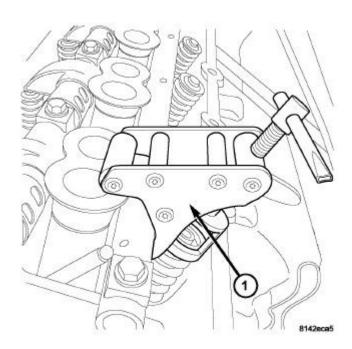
VALVE SPRING REMOVAL/INSTALLATION EXHAUST Courtesy of CHRYSLER LLC
